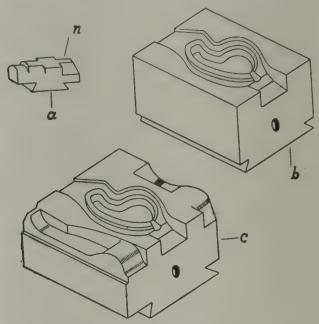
FORGING AND DROP FORGING DIES USED FOR THE PRODUCTION OF DROP FORGINGS:
